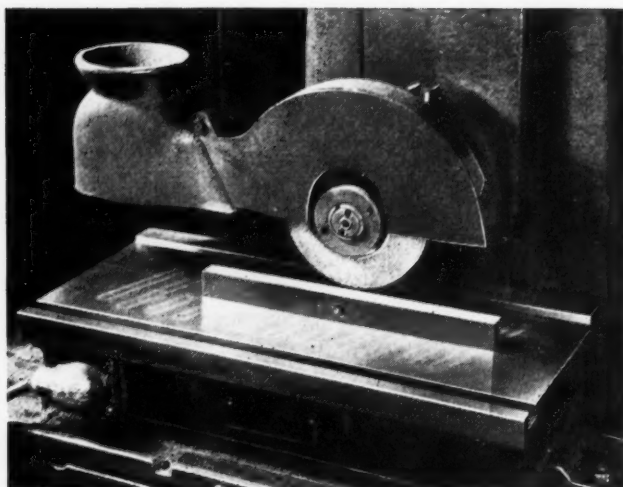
Surface Grinding Provides a Convenient Method of Removing Small Amounts of Stock in Assembly Work
